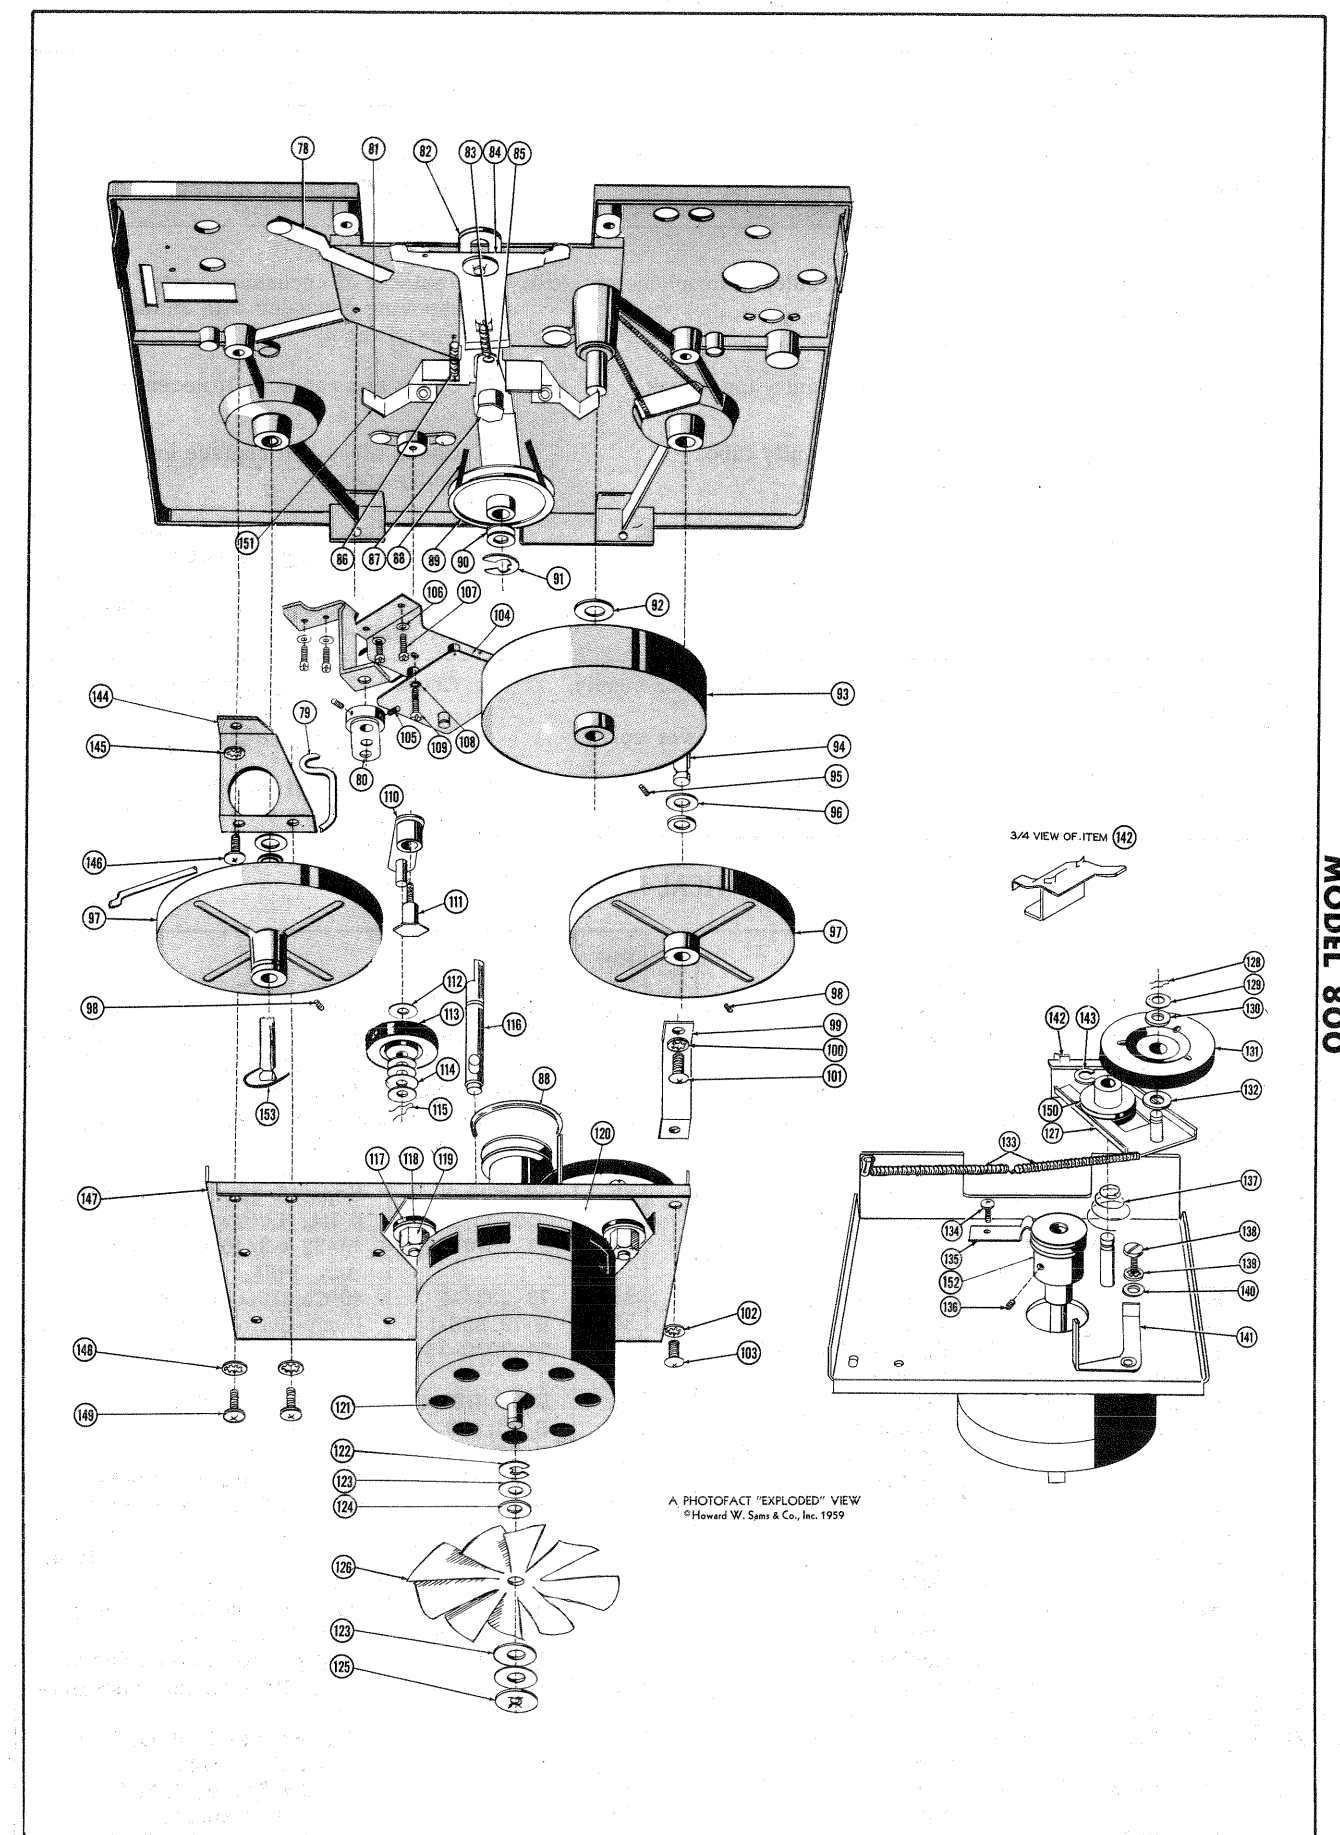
B EXPLODED VIEW OF PARTS BELOW BASEPLATE
